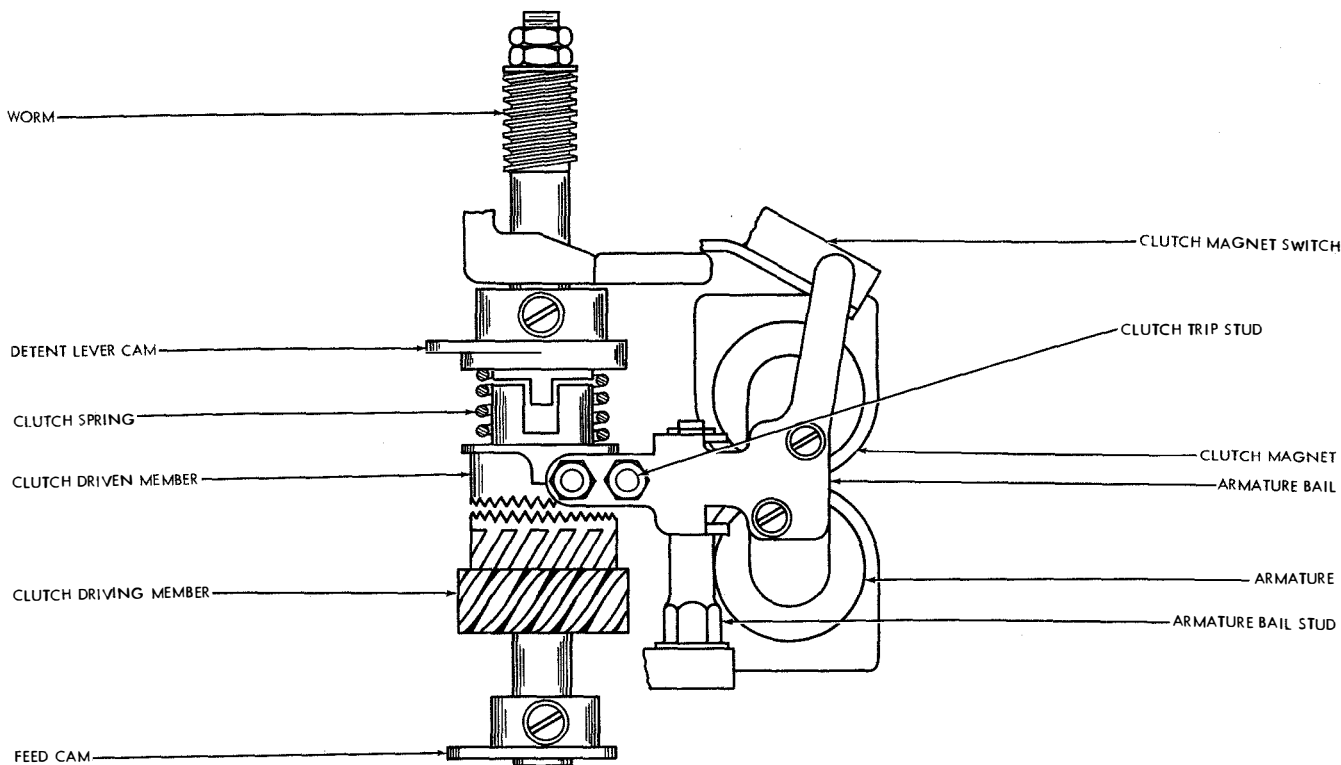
Automatic Tape Feed Out, Main Shaft, and Clutch Assembly
